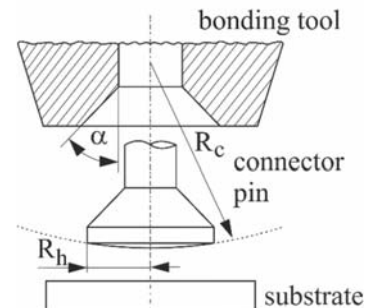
Design parameters of bonding tool and connector pin: flank angle α , convexity R_c , and bottom radius R_h , [5] - [7].
